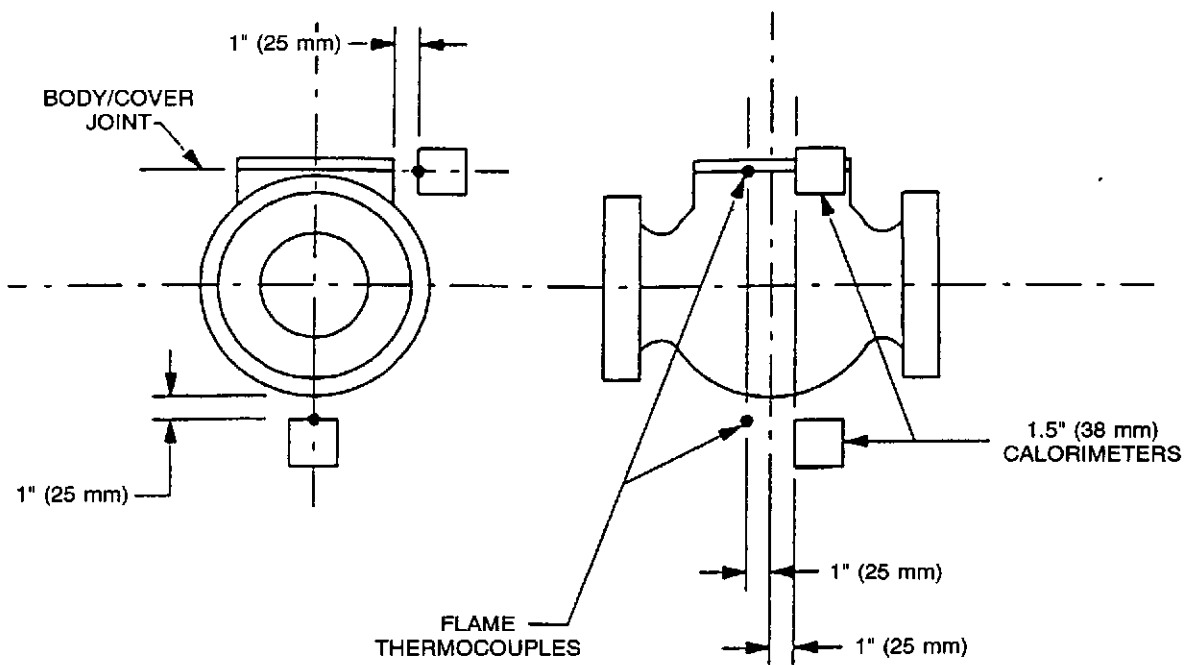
Location of Thermocouples and Calorimeters—Smaller Flanged Check Valves
